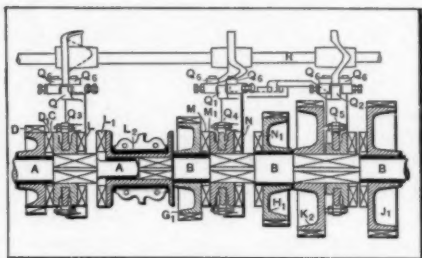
Arrangement of a main shaft and position of clutches on third speed gear
